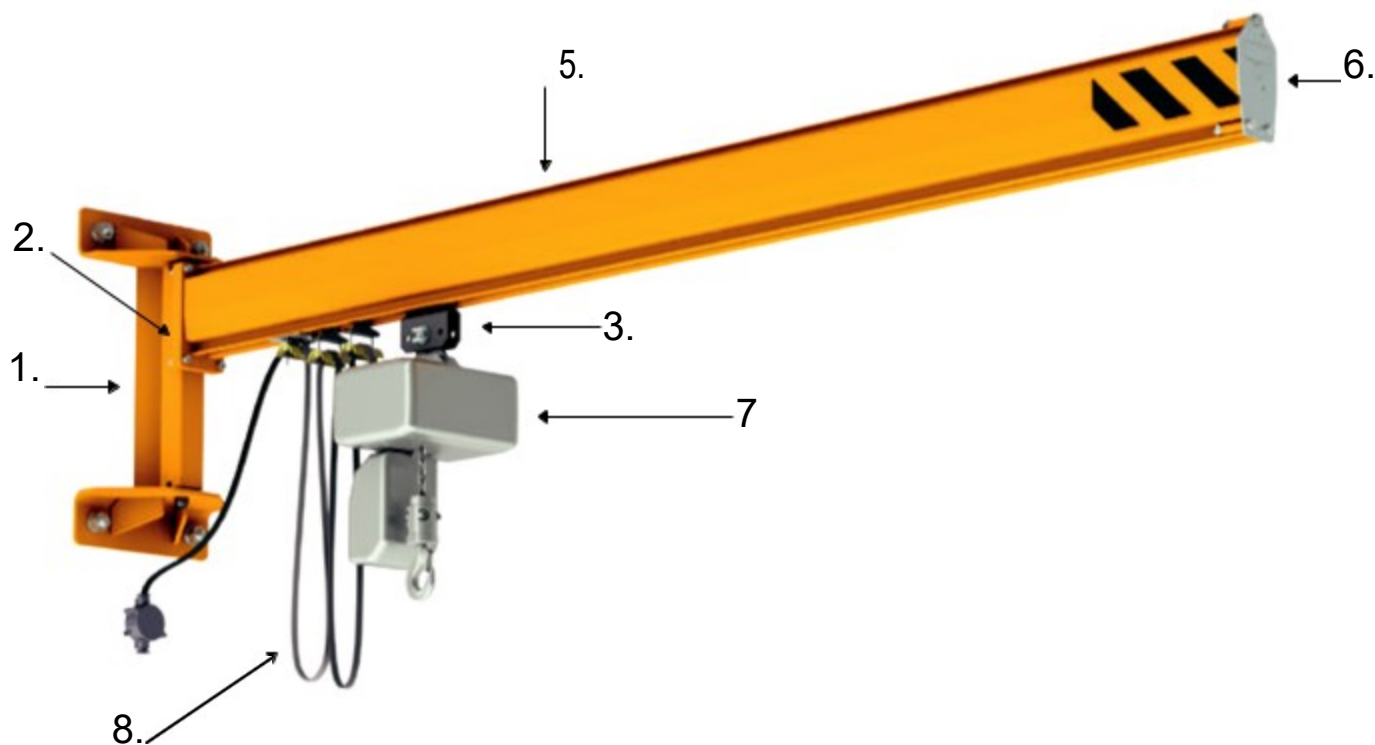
Wall-mounted jib crane for low headroom applications, steel
